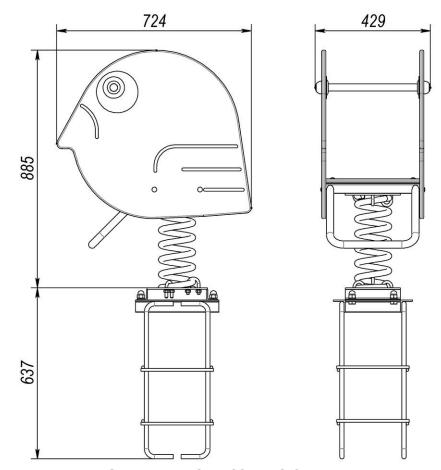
Concreting scheme Examples of impact-absorbing coatings
